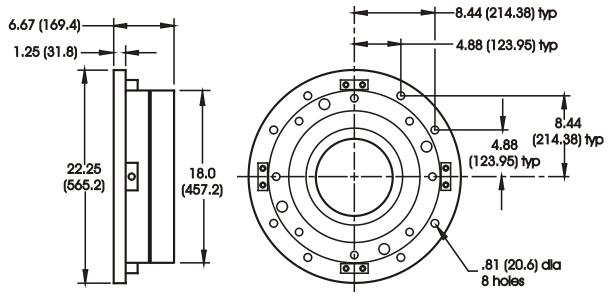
Dimensions of the self-aligning bearing assembly without spider
